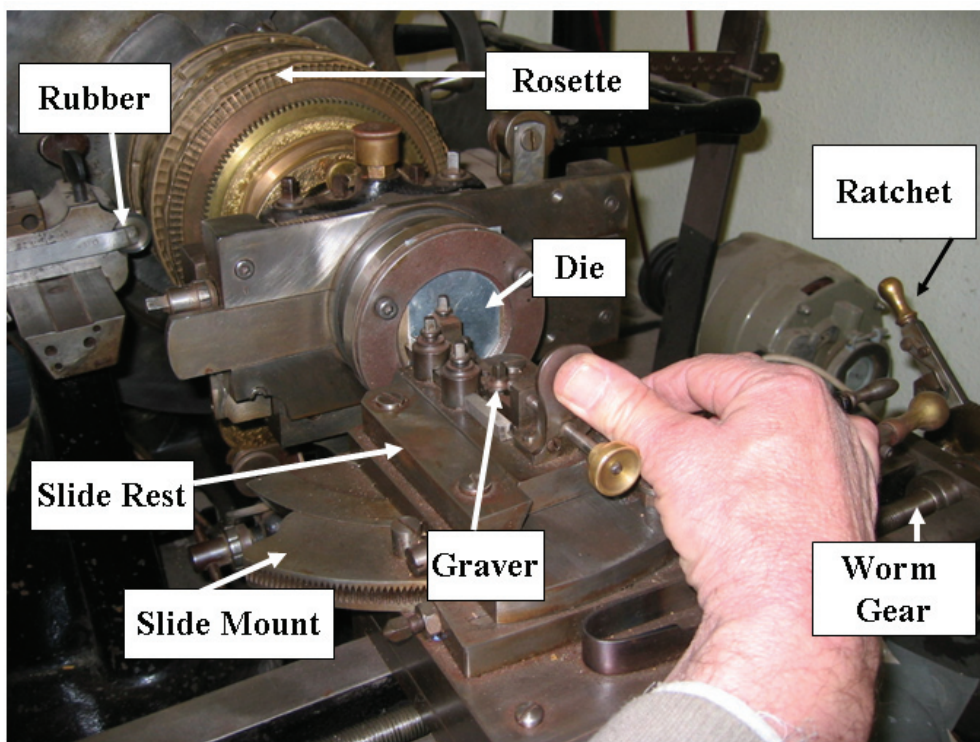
Details of the engraving end of the rose engine shown in Figure 10. The die being worked on is at center, bolted securely in the chuck. The cutting tool (graver) is mounted on a slide that is brought into contact with the die by thumb pressure.
